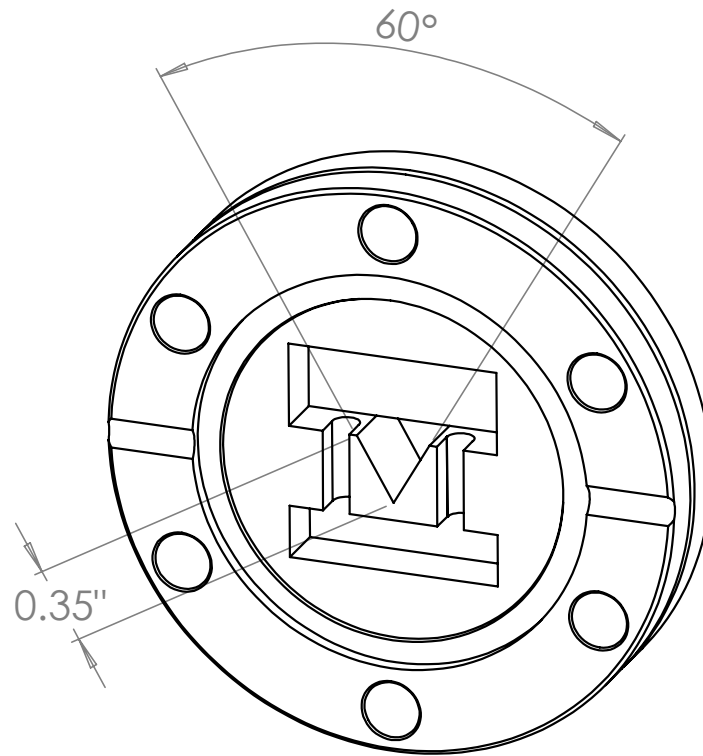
Drawing of channel and clamping pocket machined in CF blank.
